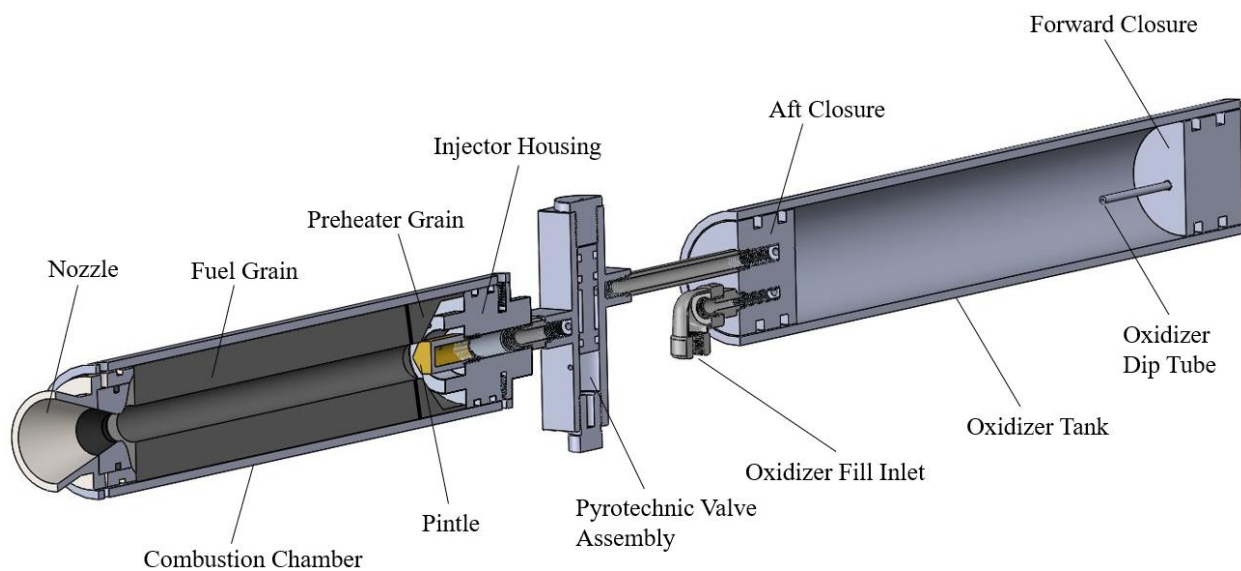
Diagram of hybrid motor with cylindrical fuel grain.
